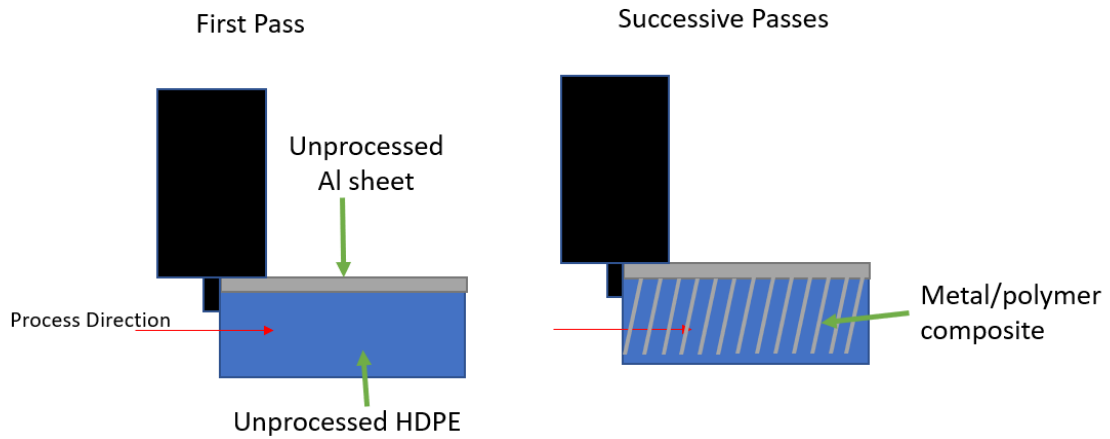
Left: Leading edge of tool pin in contact with unprocessed aluminum sheet on top and unprocessed HDPE on bottom during the first pass. Right: Shifted tool pin during successive passes is in contact with both processed composite and virgin material.
